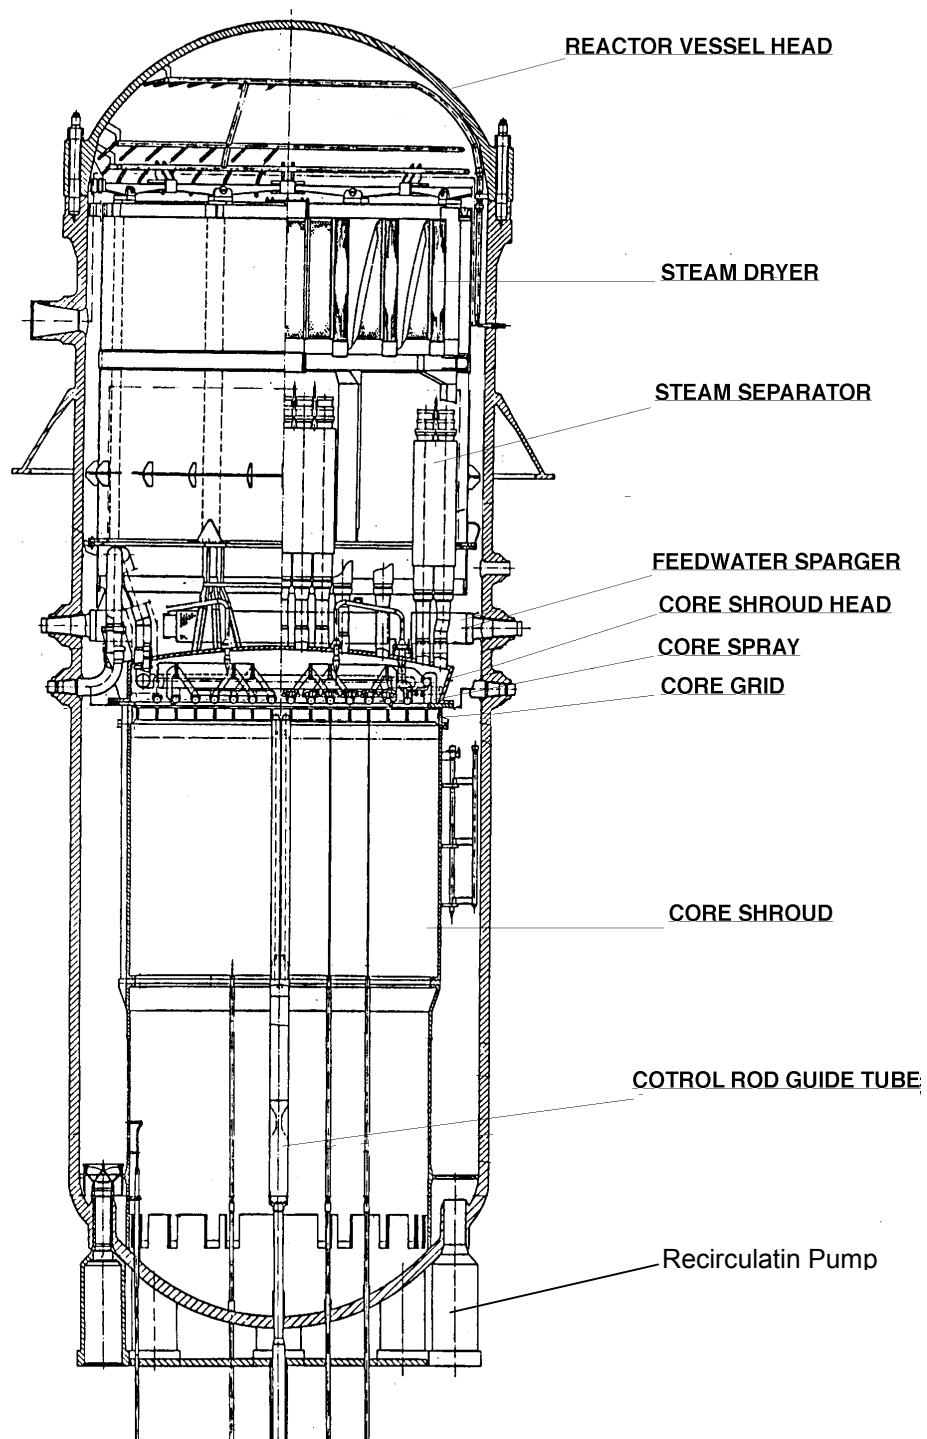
(a.) ABB reactor assembly of internal pump RPV (BWR 660).
